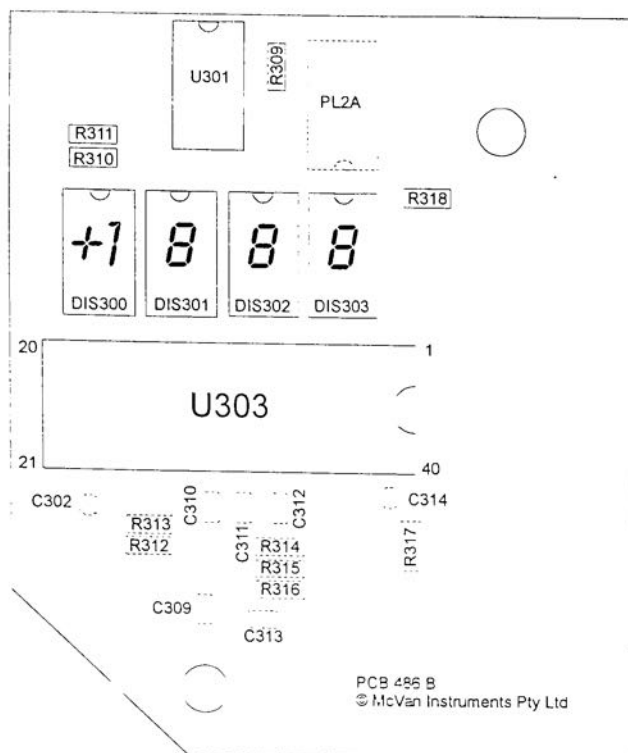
PCB486 and PCB487 DVM Layout and Component Designations
